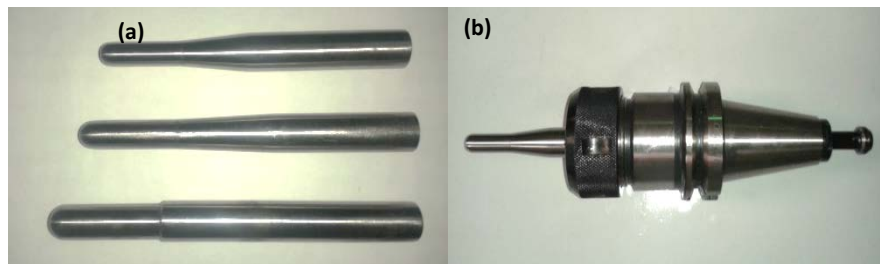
(a) Tool geometry. (b) Forming tool clamped with tool holder.
